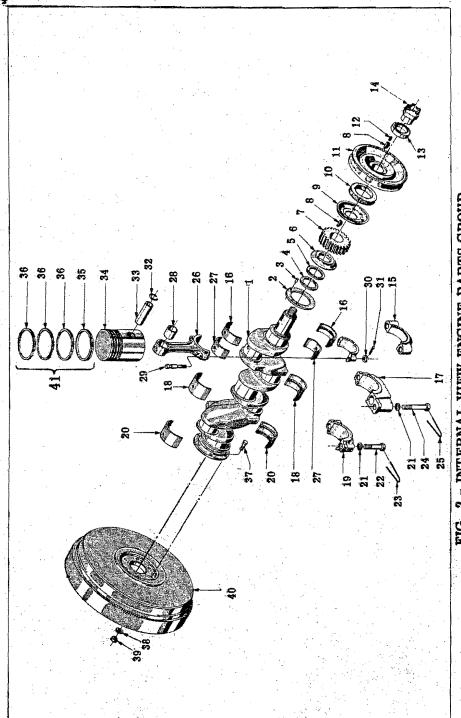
INTERNAL VIEW ENGINE PARTS GROUP
